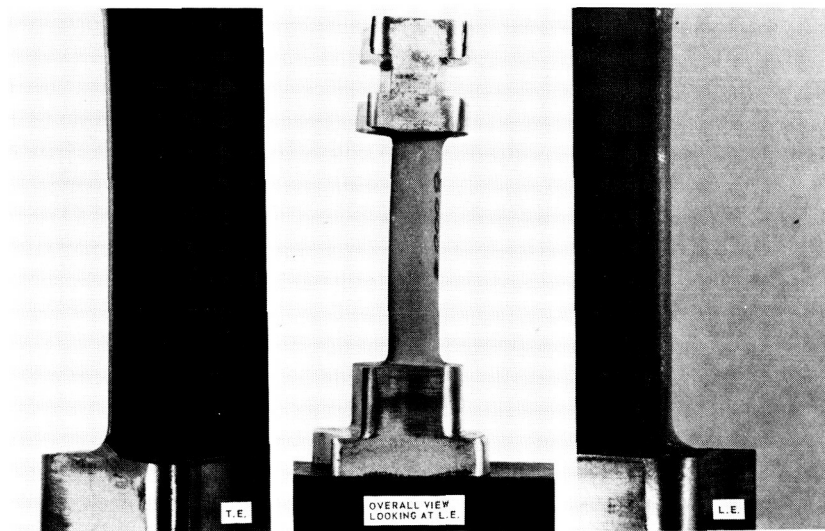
PWA 663 Uncooled Solid Blade Specimen After Test No. 6 (XP-75623)
